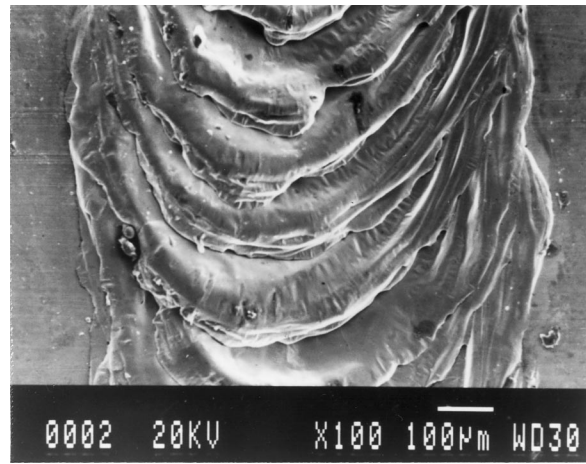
Weld bead surface of a weld made with a top-hat temporal pulse shape.
